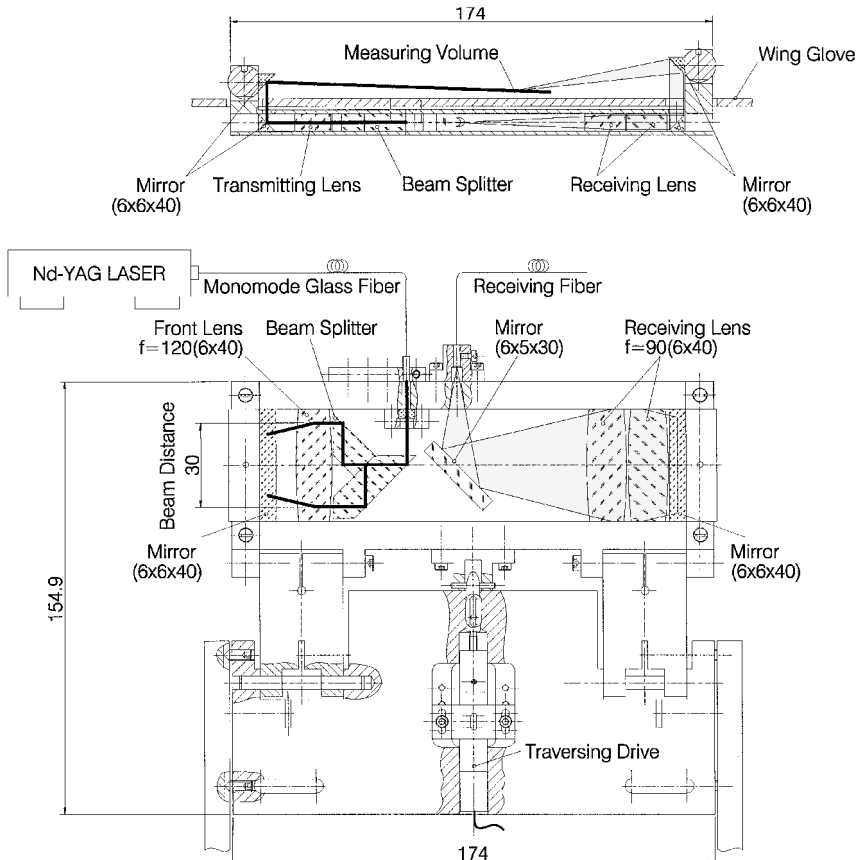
Cross-sectional view of Nd-YAG LDA probe for in-flight measurements.
